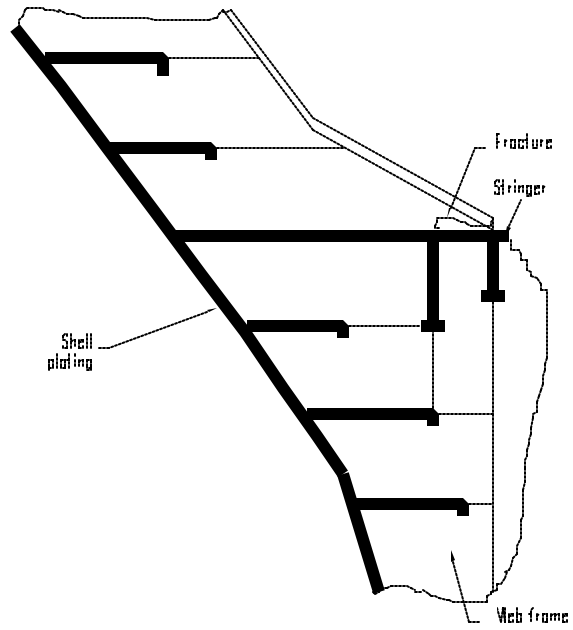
Fractured vertical web at the longitudinal stiffener ending in way of the parabolic bow structure.
